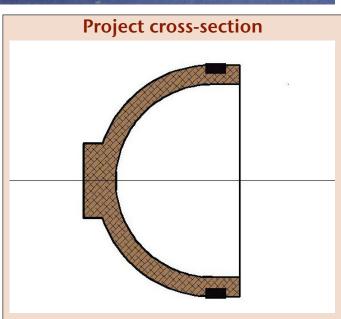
The completed project in cross-section shows how the inlayed ring relates to the form.
